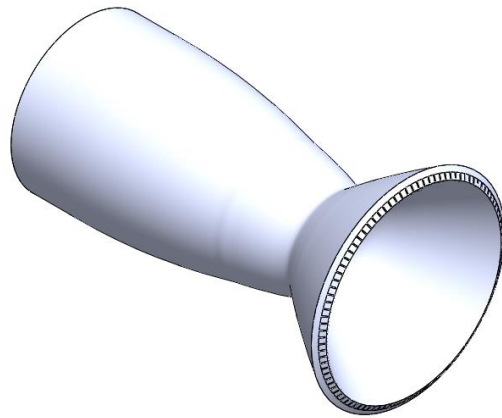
CAD Model of Thrust Chamber with Regenerative Cooling Channels, Isometric View
